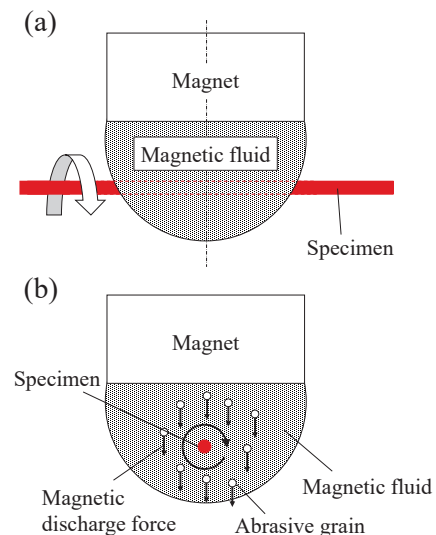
Schematic representation grinding showing a specimen subjected to magnetic fluid grinding, (a) Front view and (b) Sectional view.
